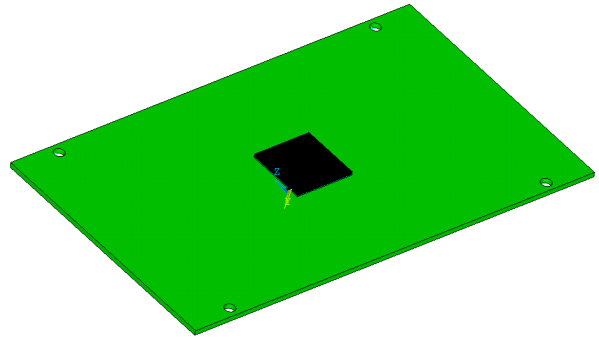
Modeled PCB- PBGA324 Package assembly.
